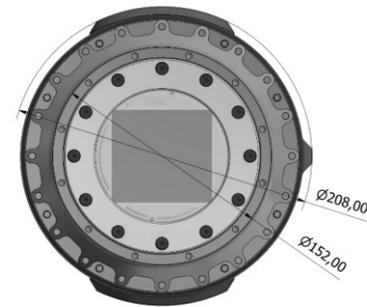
CAD mechanical drawing presenting the dimensions, front view
